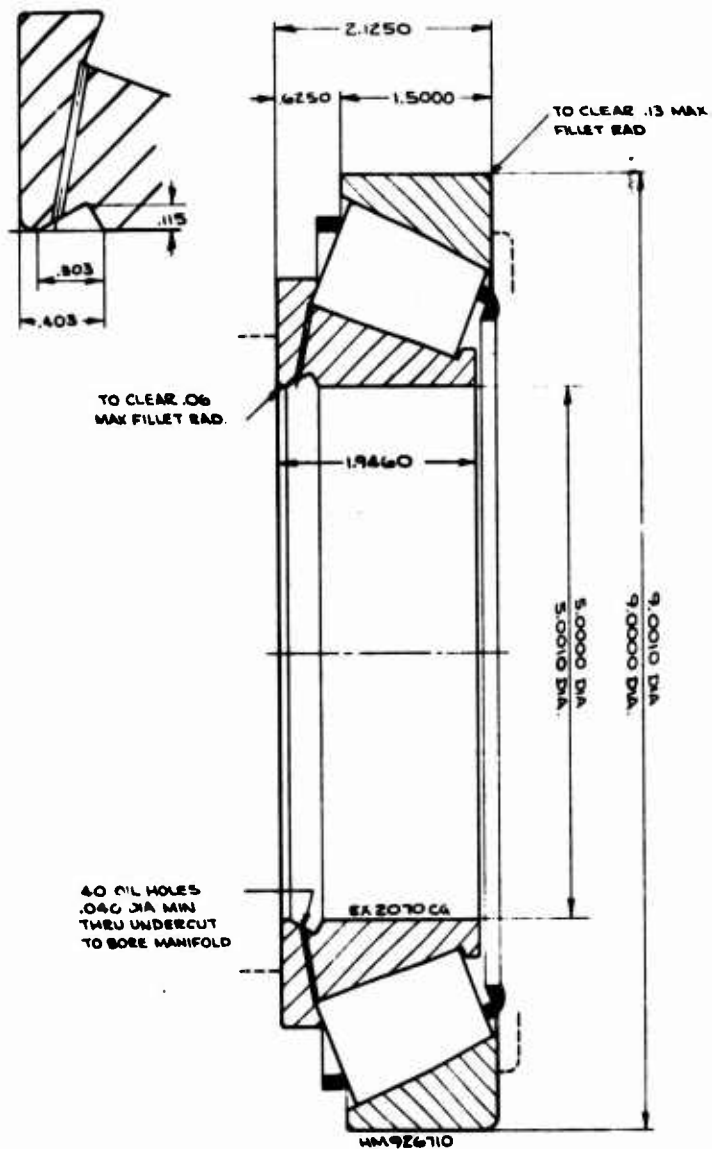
HM926700-Series Bearing Assembly New Manifold - 40 Oil Holes.
